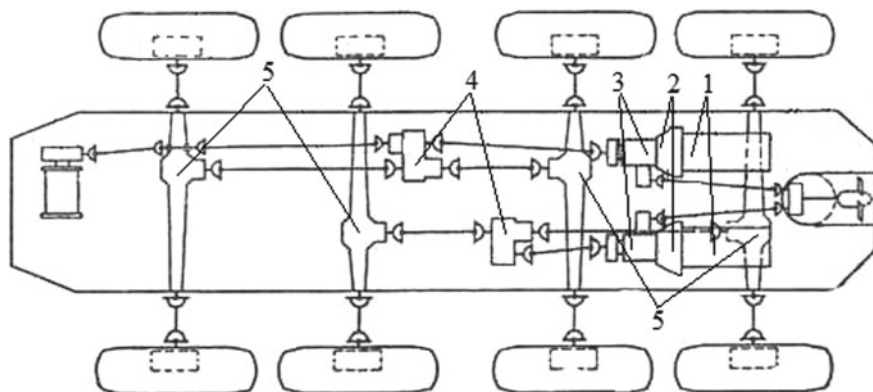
The BTR-70 vehicle transmission. 1—ICE; 2—clutch; 3—main gearbox; 4—additional gearbox; 5—rear axle
